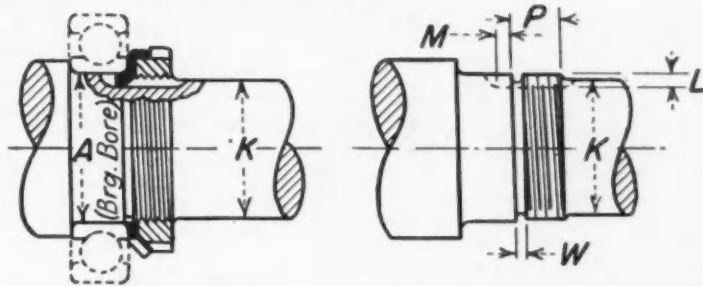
Shafts for ball bearing lock nuts, shown in the newly revised SAE Standard for Ball and Roller Bearing Lock Nuts and Washers
